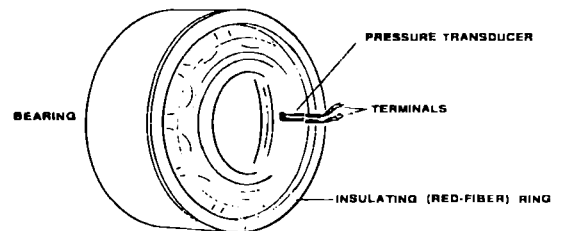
Schematic drawing showing surface-pressure transducer in an 85-millimeter split inner ring bearing.
